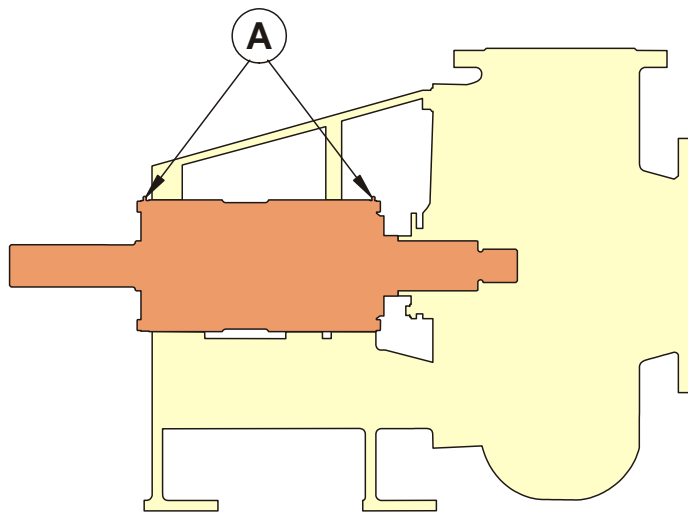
Lubrication point diagram- Bearing greasing points (A)
